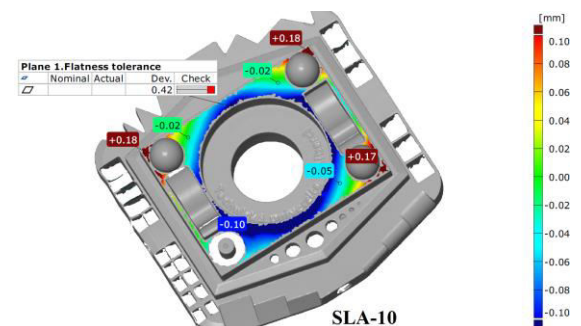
Inspection of surface flatness after a year with test-1 & 2
